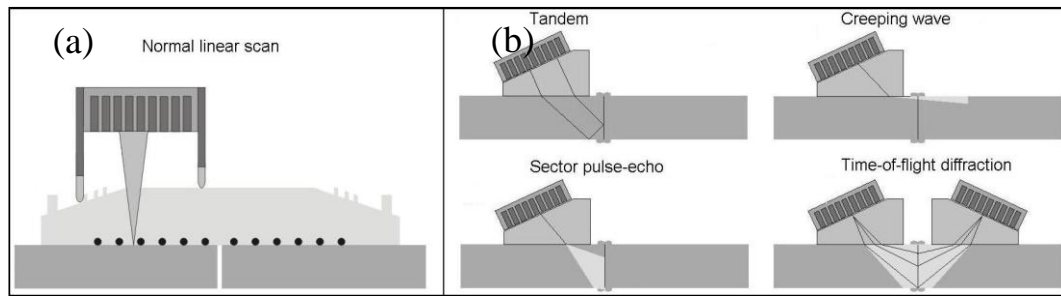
The developed inspection techniques. (a) EF joints. (b) BF joints.
